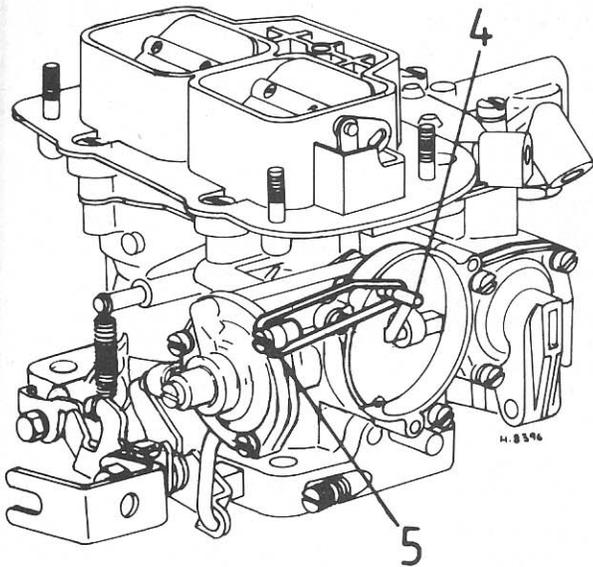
Checking the automatic choke shaft setting on DGAV type carburetors (Sec 8)
